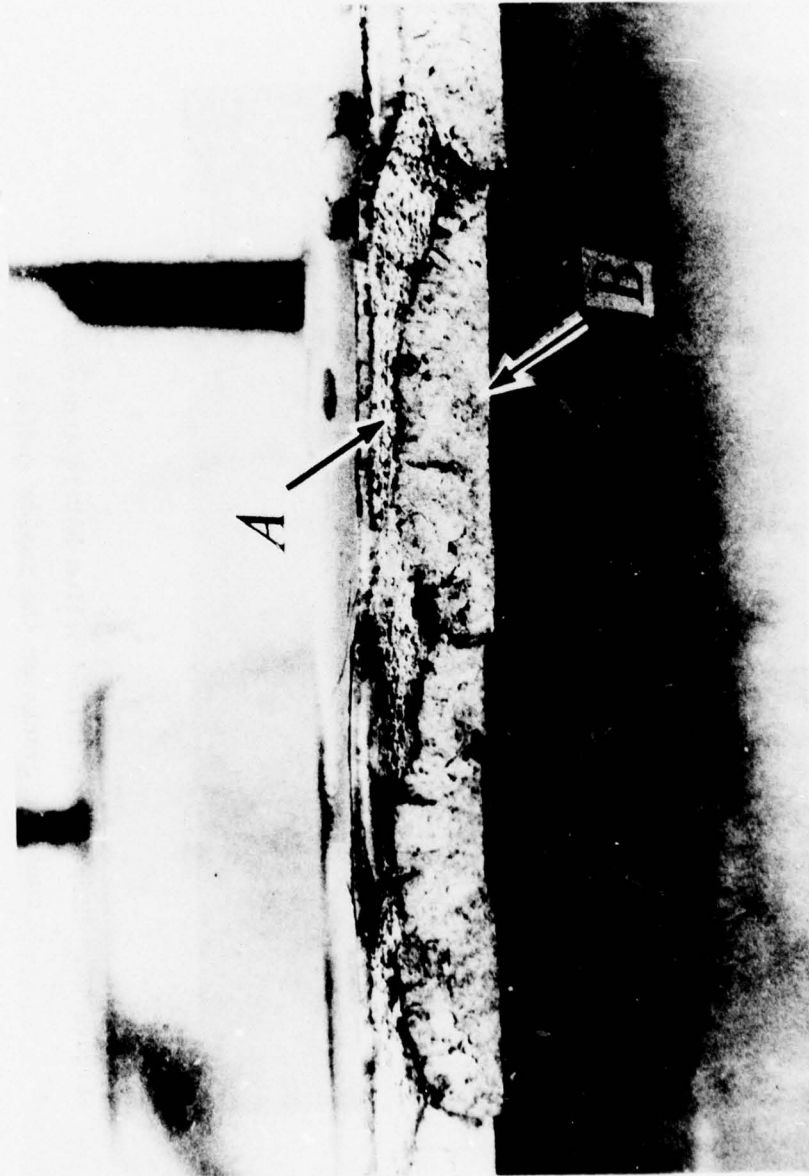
Fracture surface. Cracks progressed slowly to approximately 0.180 inch through the 0.200 inch thick wall before bursting occurred.
